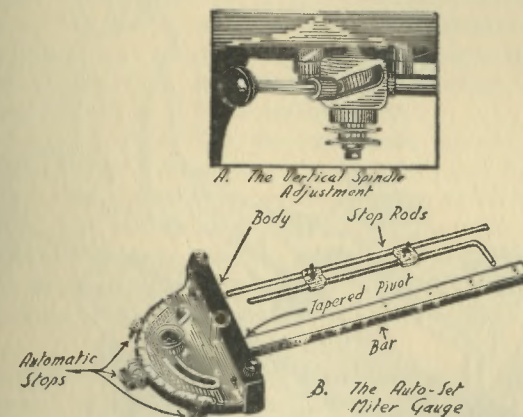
DETAILS OF THE SPINDLE ADJUSTMENT AND MITER GAUGE
